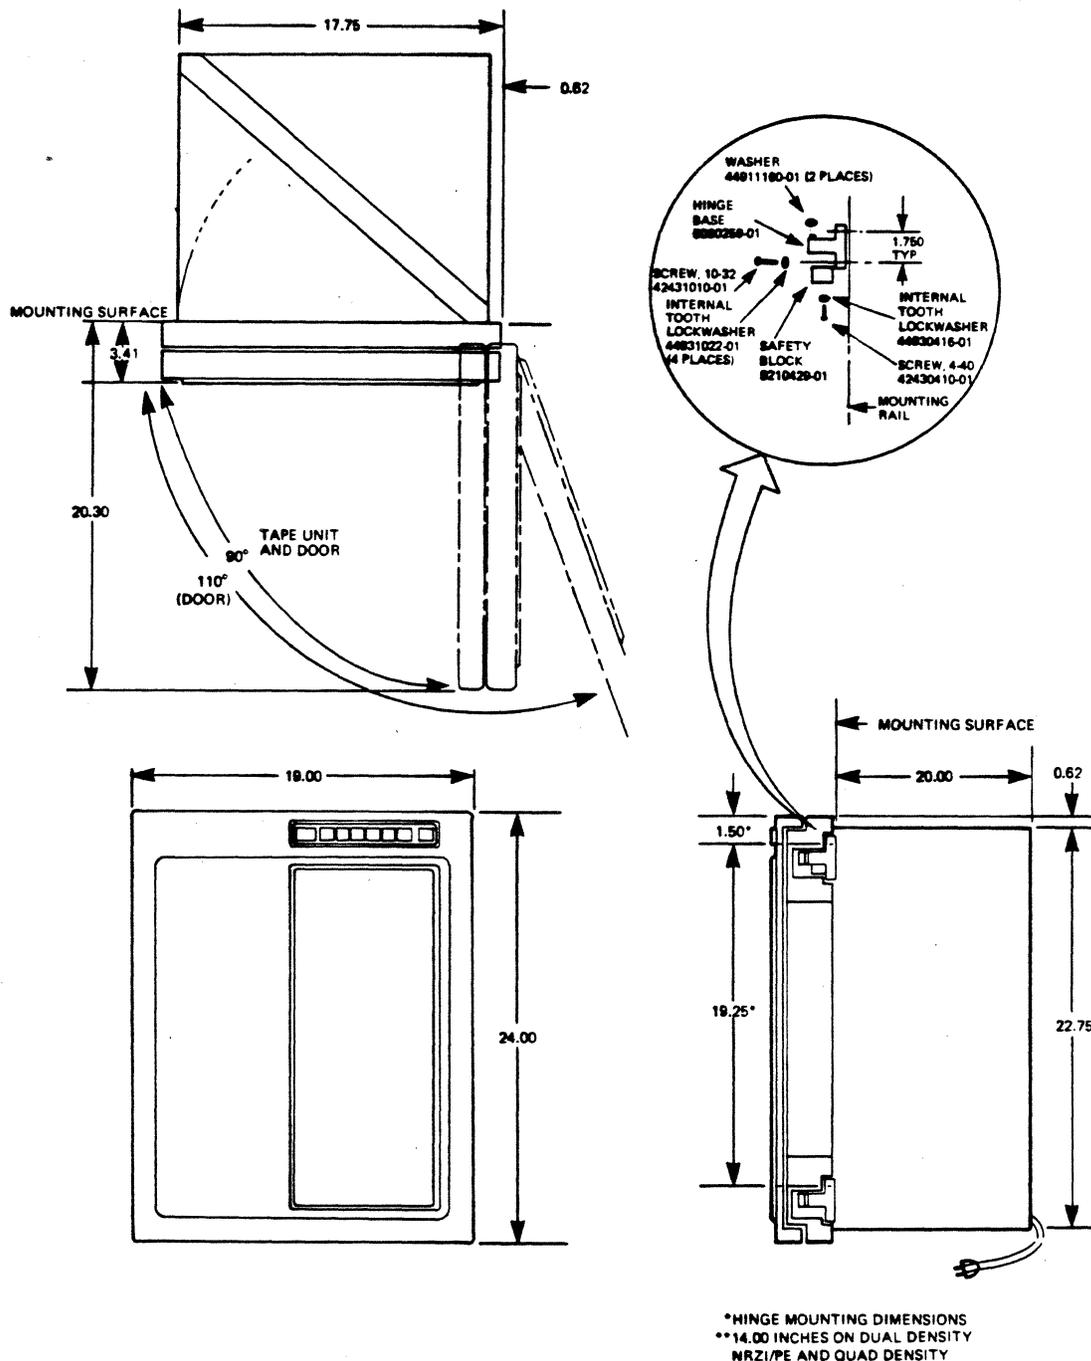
Installation Mounting Dimensions for the 2790 Tape Unit
